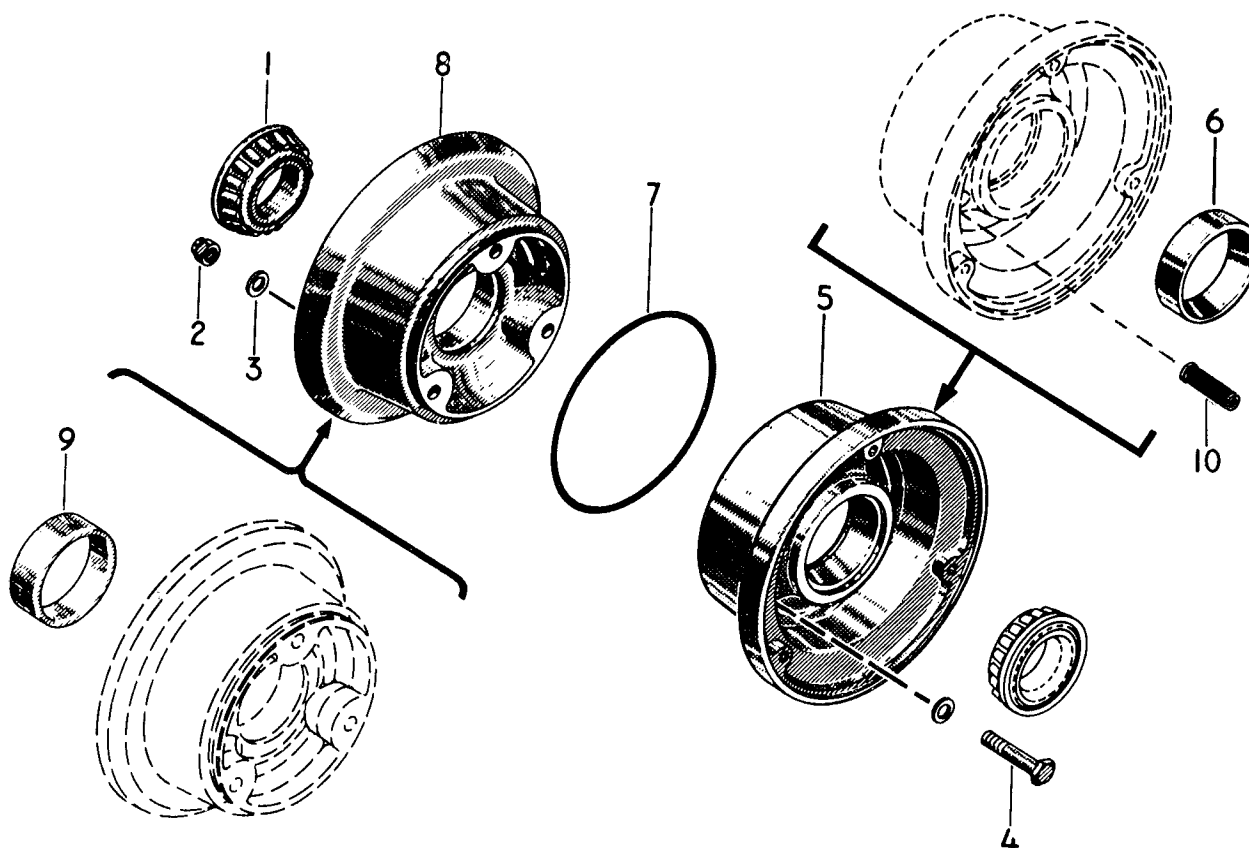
Nosewheel Assemblies 9532669 and 9532926
